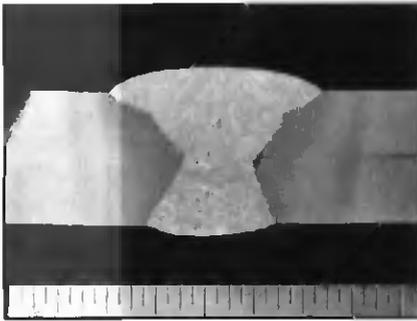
Incomplete fusion in the fill weld due to a slag pocket on one side of the root bead.
